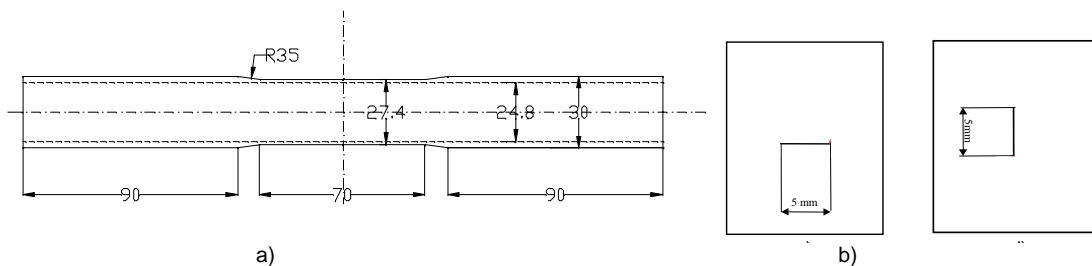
Experimental tests: a) tubular test specimen, b) micronotch directions.
